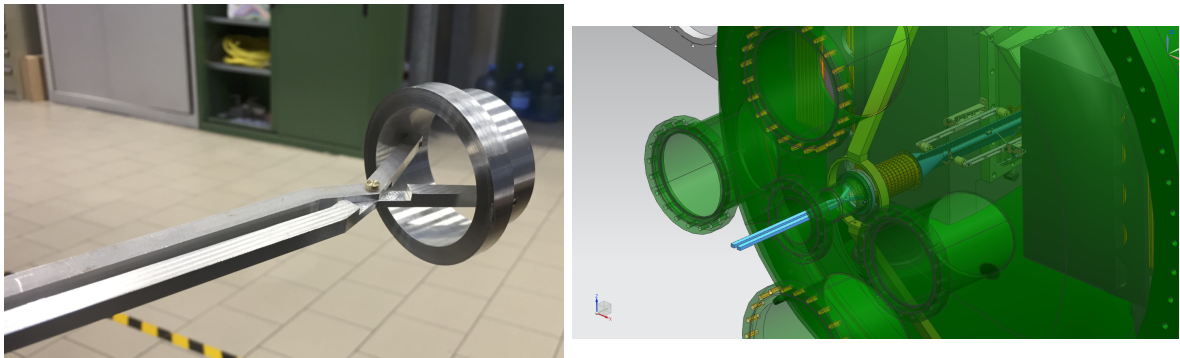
Tool used to connect the engaging flange of the WFS to the intermediate flange (left) and its use (right).
